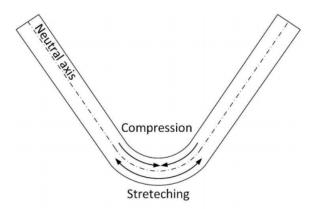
Bending plane, compression and stretching of sheet metal (Baig et al., 2021, p. 3)
